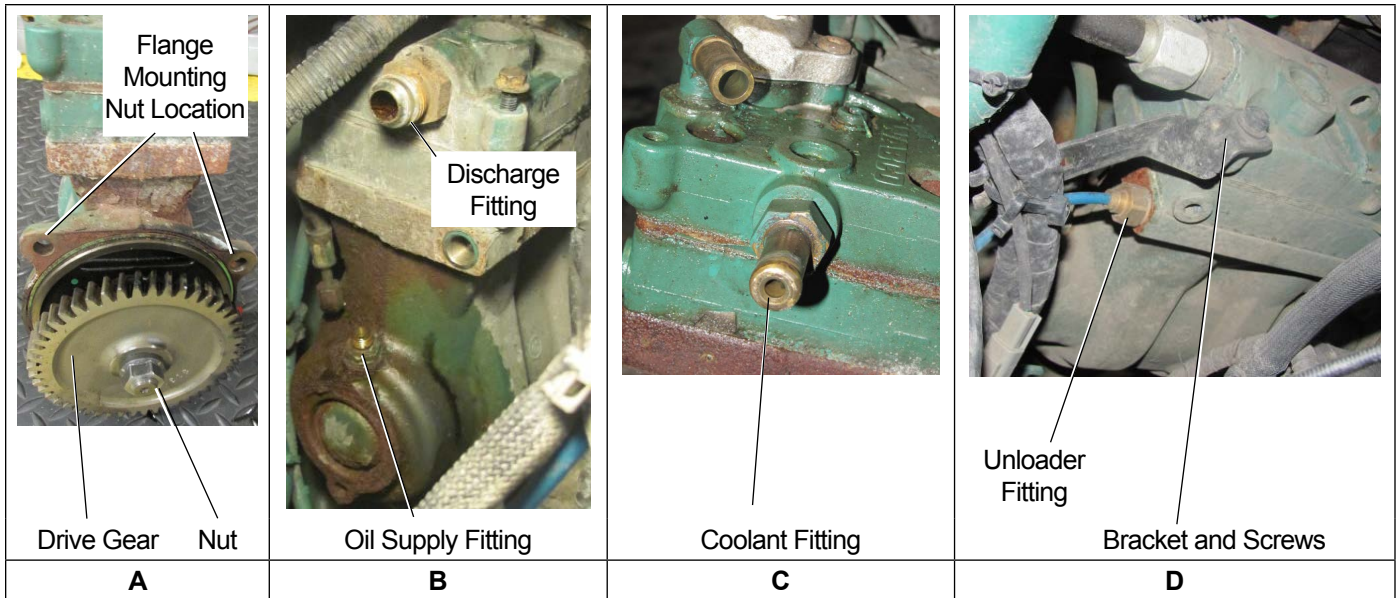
Hardware That Must Be Removed From The Compressor Being Replaced
